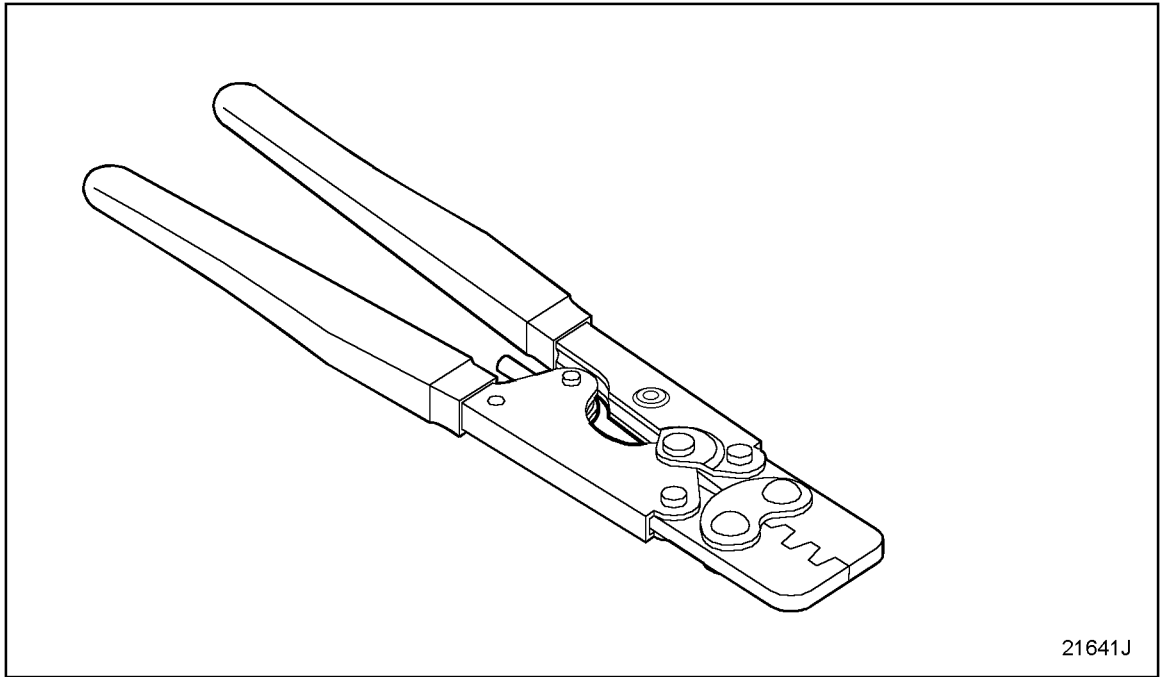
Crimping Tool, J 38852 or J 39848
